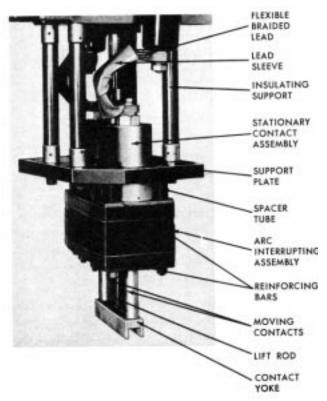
Exhaust side of interrupter housing. Note position of reinforcing plates. (Reclosers below serial no. 1001)
